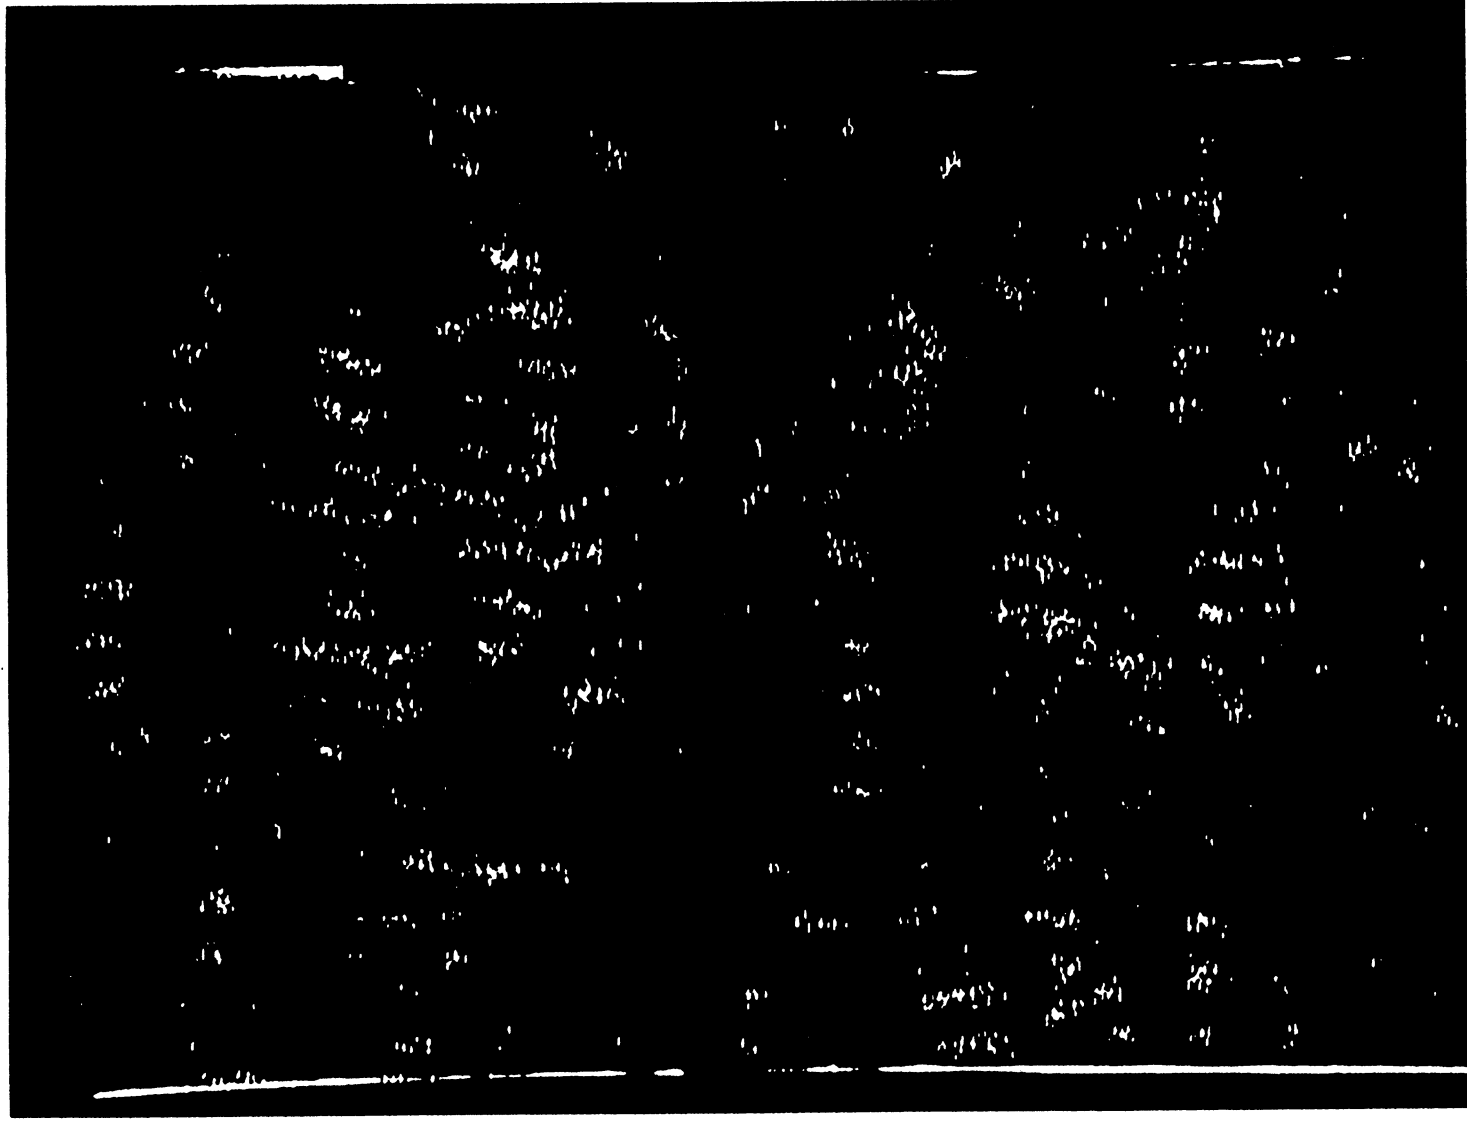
Backlight photograph of aluminum foil #CR3 showing hole patterns.
